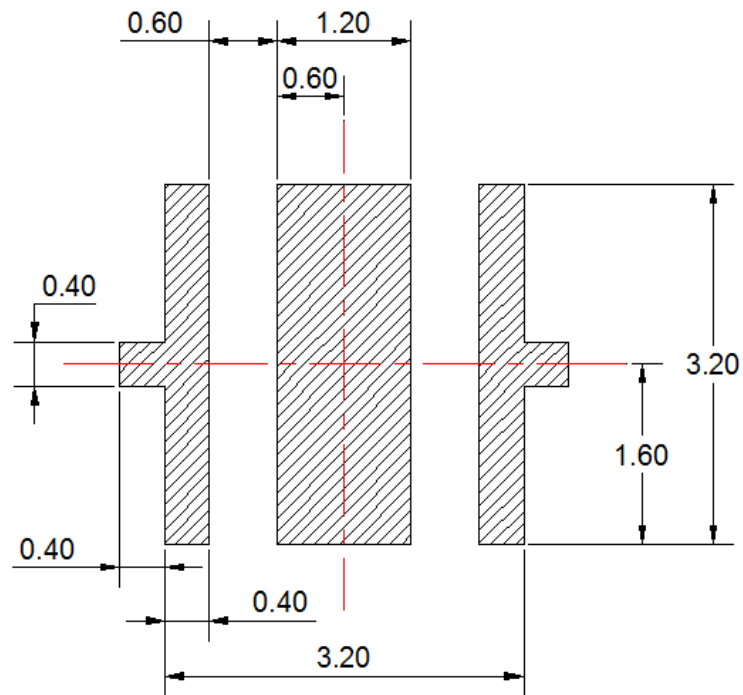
C3535 LED recommended solder pad and stencil pad layouts
